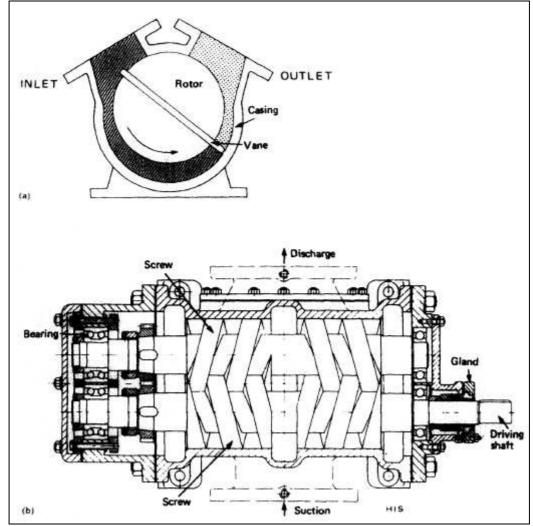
Rotary displacement pumps: (a) rotary vane displacement pump, (b) screw displacement pump.
